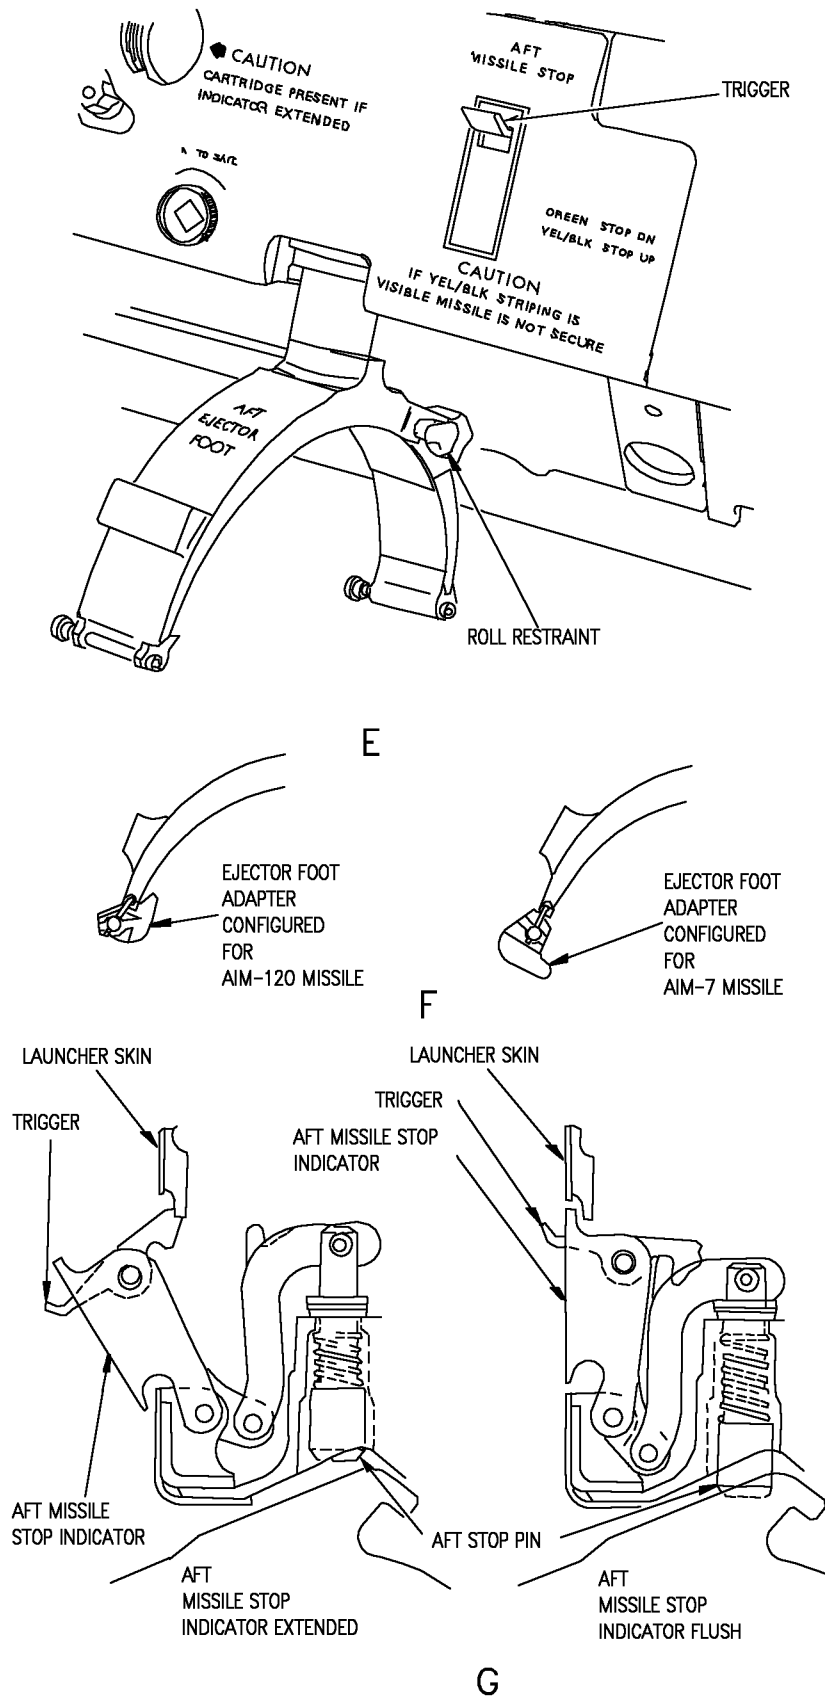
LAU-116 Launcher Inspection (Sheet 2)
